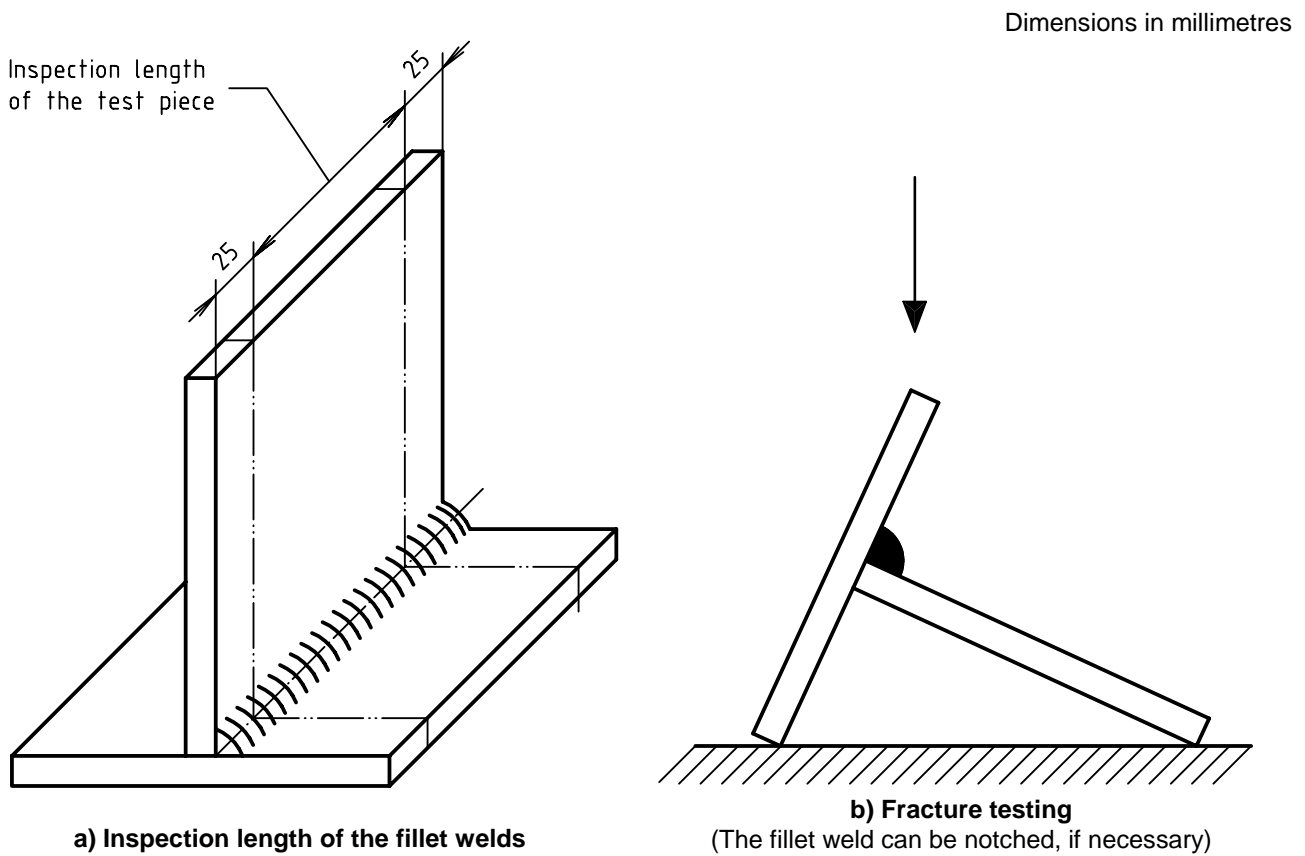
Preparation and fracture testing of test specimens for a fillet weld on plate
